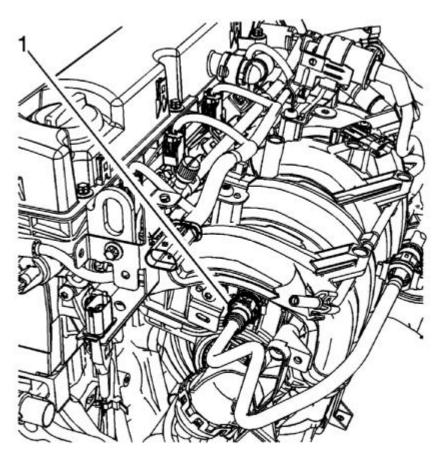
Booster Vacuum Pipe Courtesy of GENERAL MOTORS COMPANY
